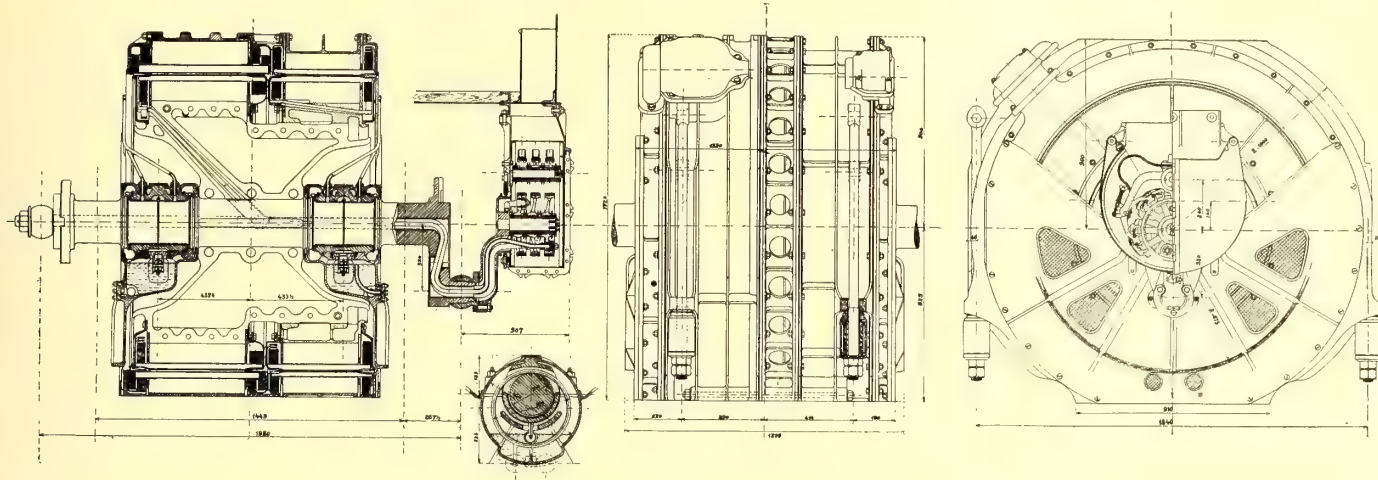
SECTION AND ELEVATIONS OF MOTOR
